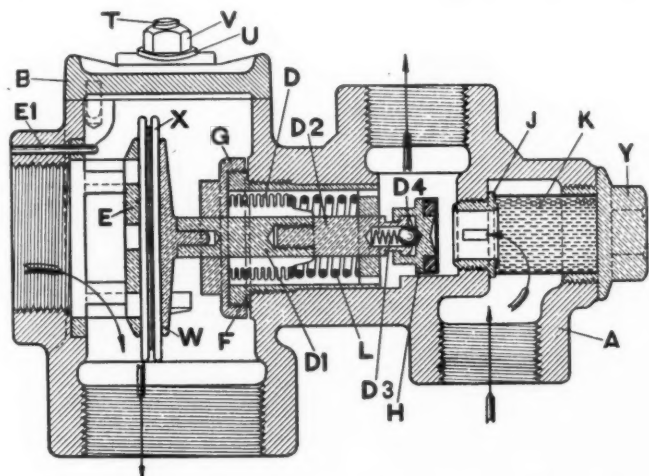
Sectional View of Gold No. X1112 Vapor Valve
